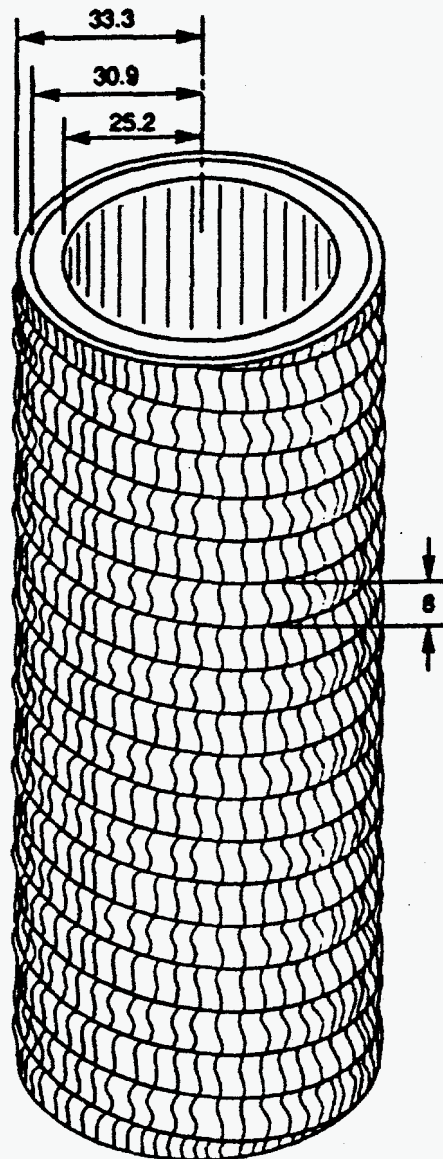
Schematic of the weld overlay tube specimen.
